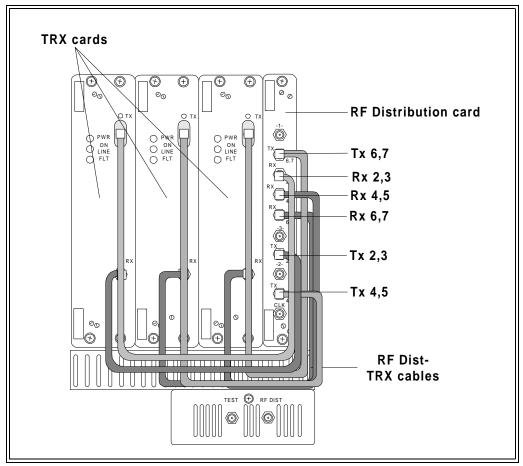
TRX card semi-rigid cables layout (only TRX to RF cables are shown above)
